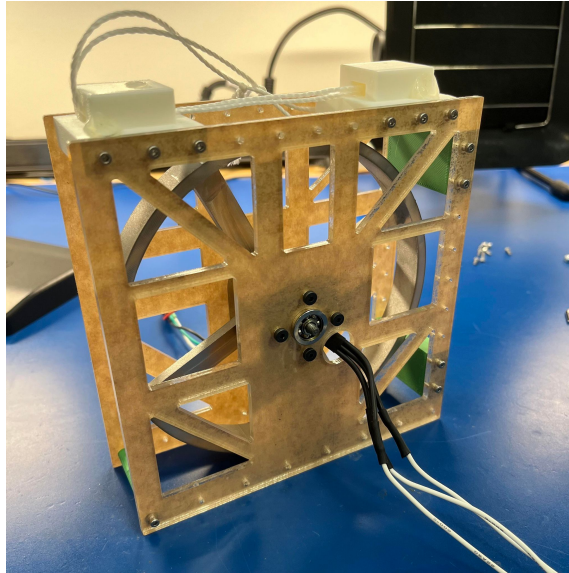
Attach rotor and stator together and screw together 3D parts
